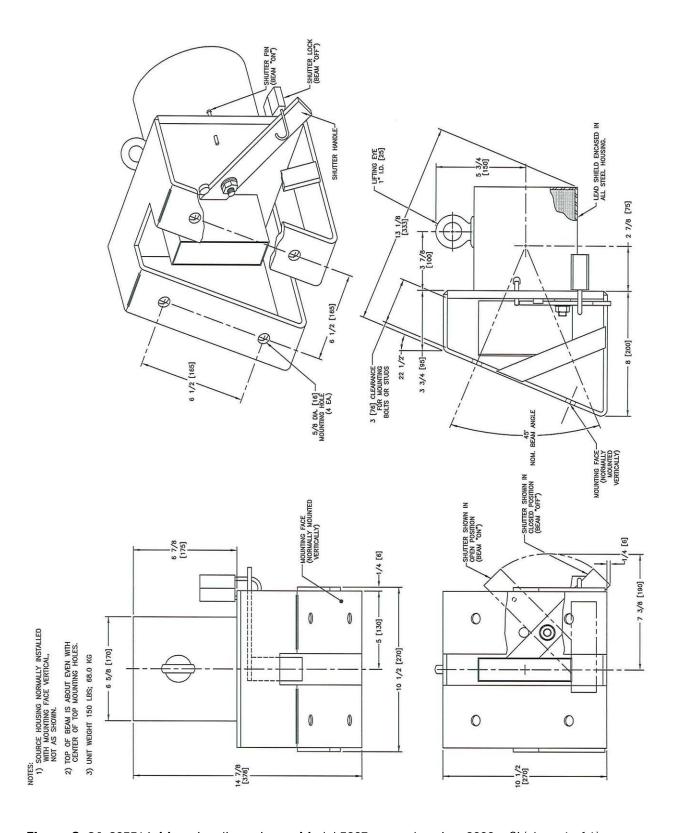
865514: Mounting dimensions - Model 5207 source housing, 2000 mCi (sheet 1 of 1)
